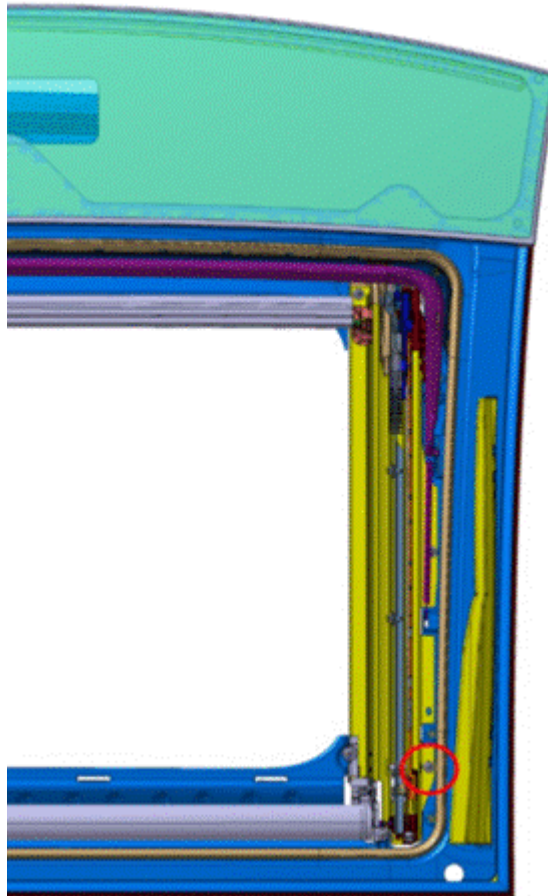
Loosen the bolt a few turns but do not remove the screw completely.
